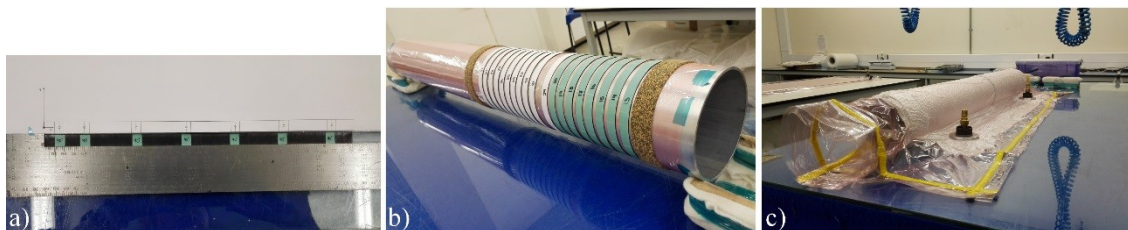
Manufacture stages of the helix strips: a) lay-up of the strips flat, including local reinforcement at the interface with the spokes; b) place of the strips on an aluminium cylindrical tool; c) vacuum bag of the laminate.
